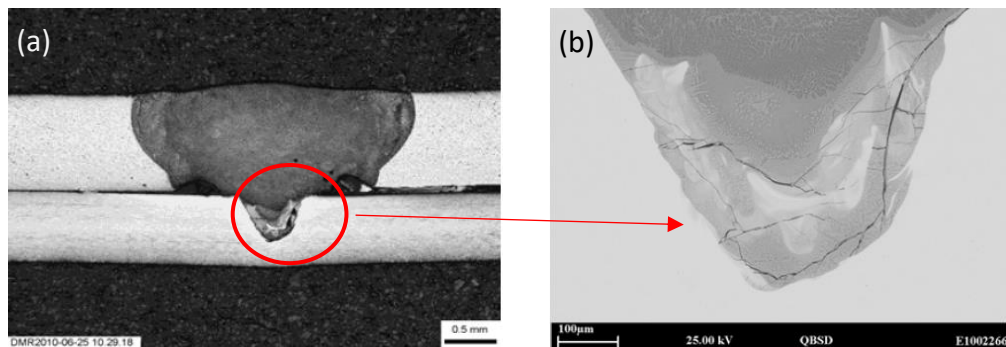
2 (a) Al - Cu laser welding in lapping configuration (b) higher magnification of the weld root showing extensive cracks in intermetallic that formed in the weld root [24].
